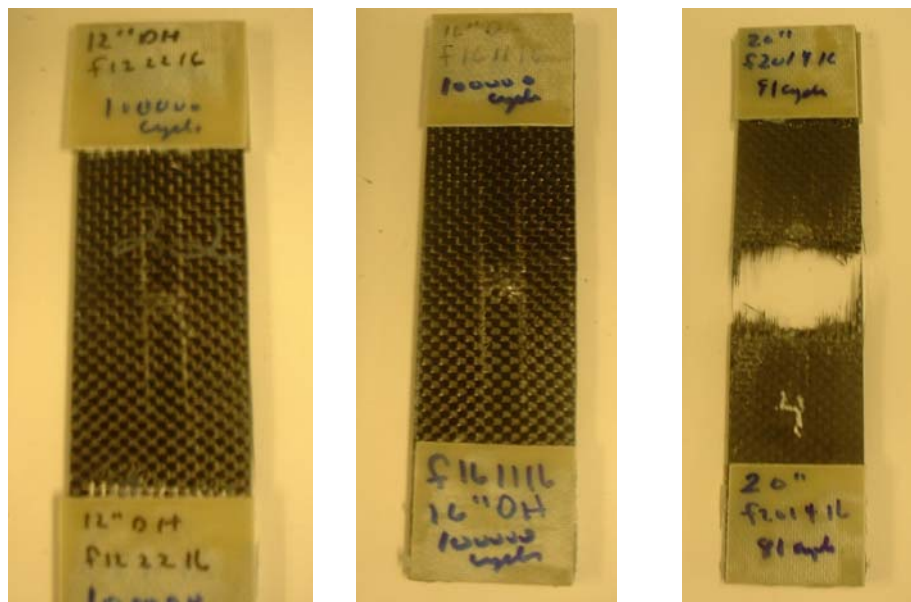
Fatigue Tested Specimens Subjected to Impact Loading of 12 Inches, 16 Inches, and 20 Inches.
